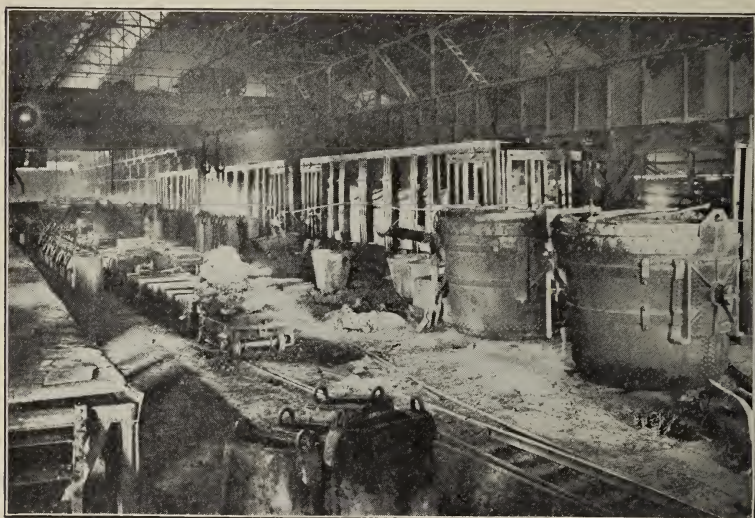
Open-hearth furnaces of a steel-manufacturing plant
